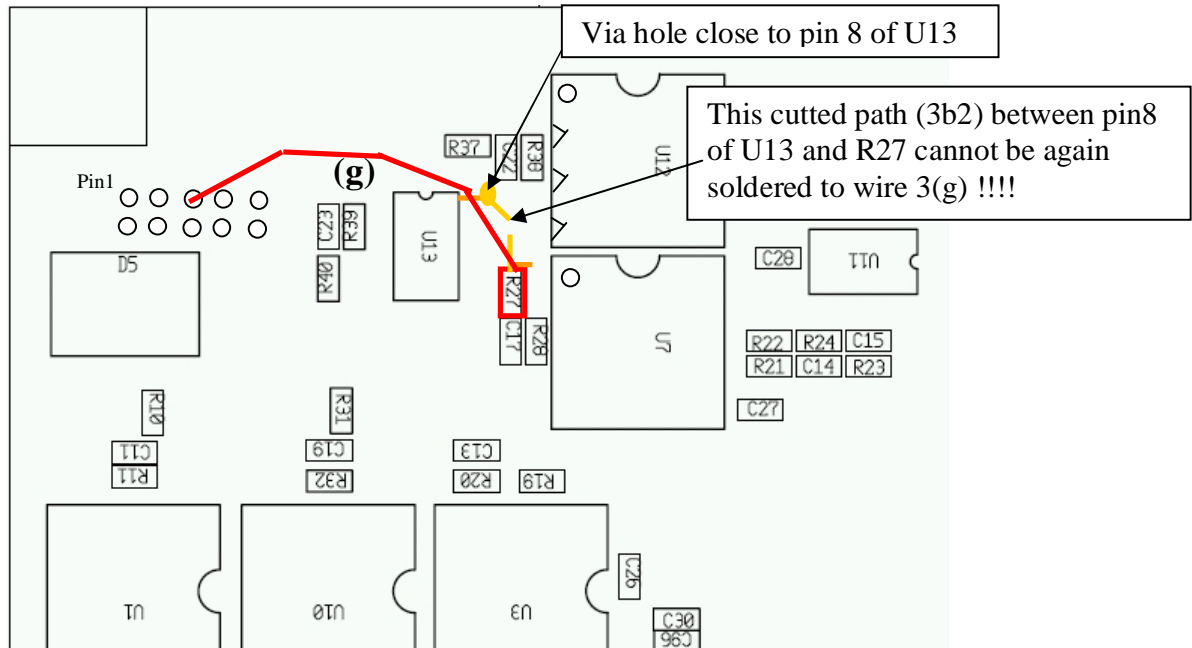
Bottom side photos of ELMB_MBv6.5. Cutting traces on bottom side.
